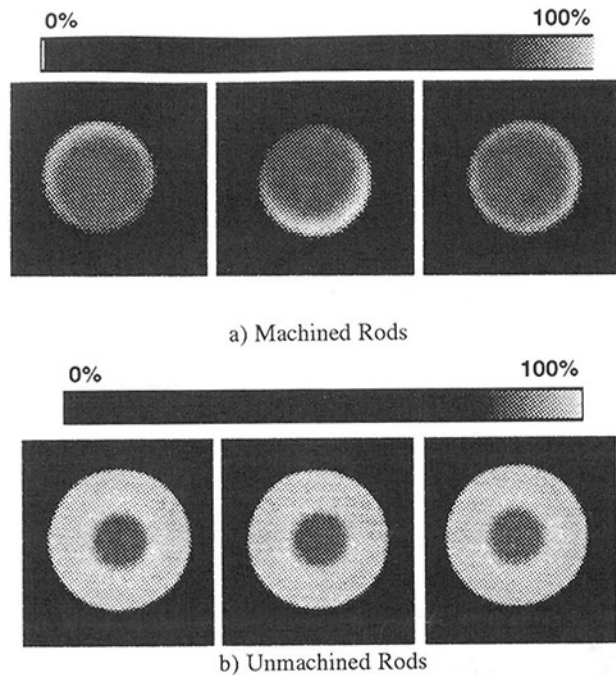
LAM/DE CT scans of MMC test rods: (a) scans show reinforced core not well-centered in machined test rods, (b) scans of unmachined test rods to provide information to guide machining operation
